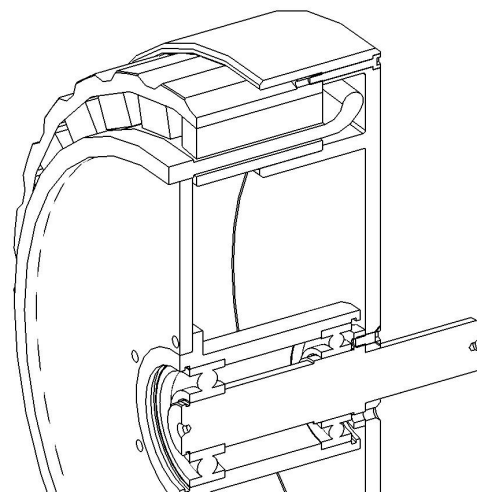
3-D Cross-Section of PM Ironless machine.
